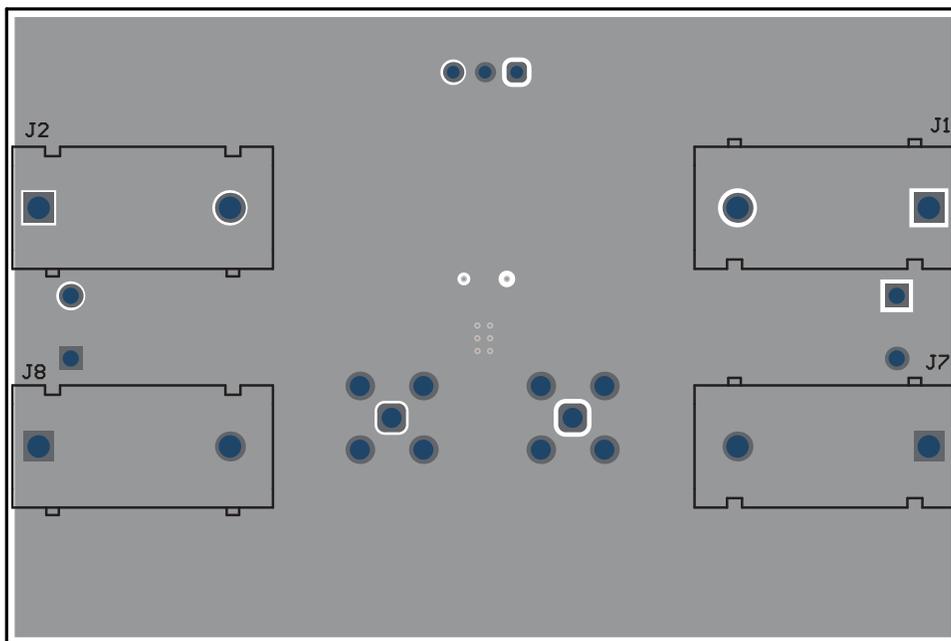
UA78LEVM-075 Bottom Assembly Layer and Silkscreen
